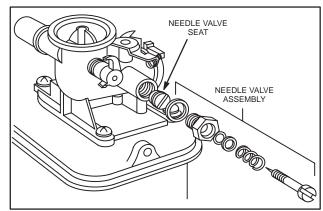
NEEDLE VALVE ASSEMBLY, SCREW-IN TYPE
